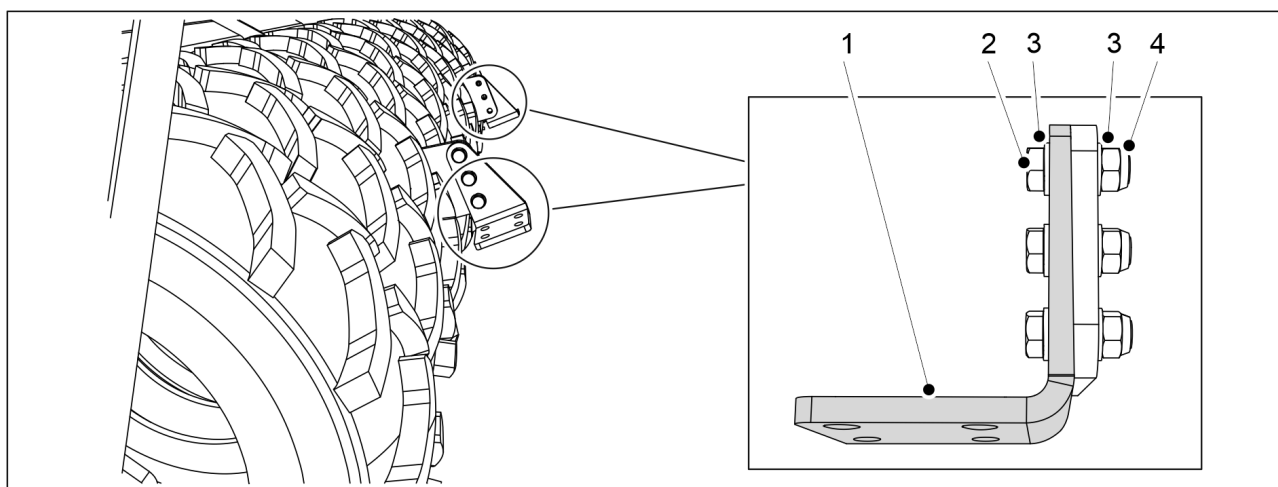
59. Mounting the scraper suspension plates
